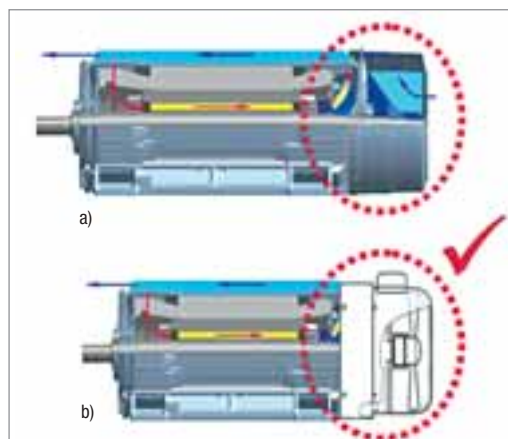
(a) Impeller directly on the motor shaft, (b) Motor with built-on forced air ventilation
